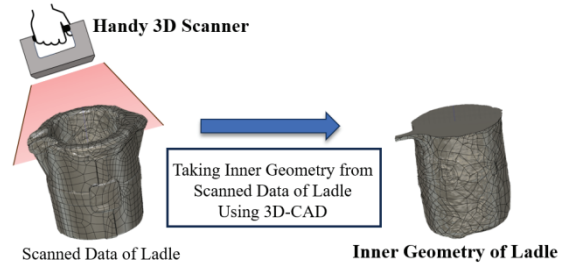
Method for Taking Inner Geometry of Ladle Using 3D-Scanner and 3D-CAD
